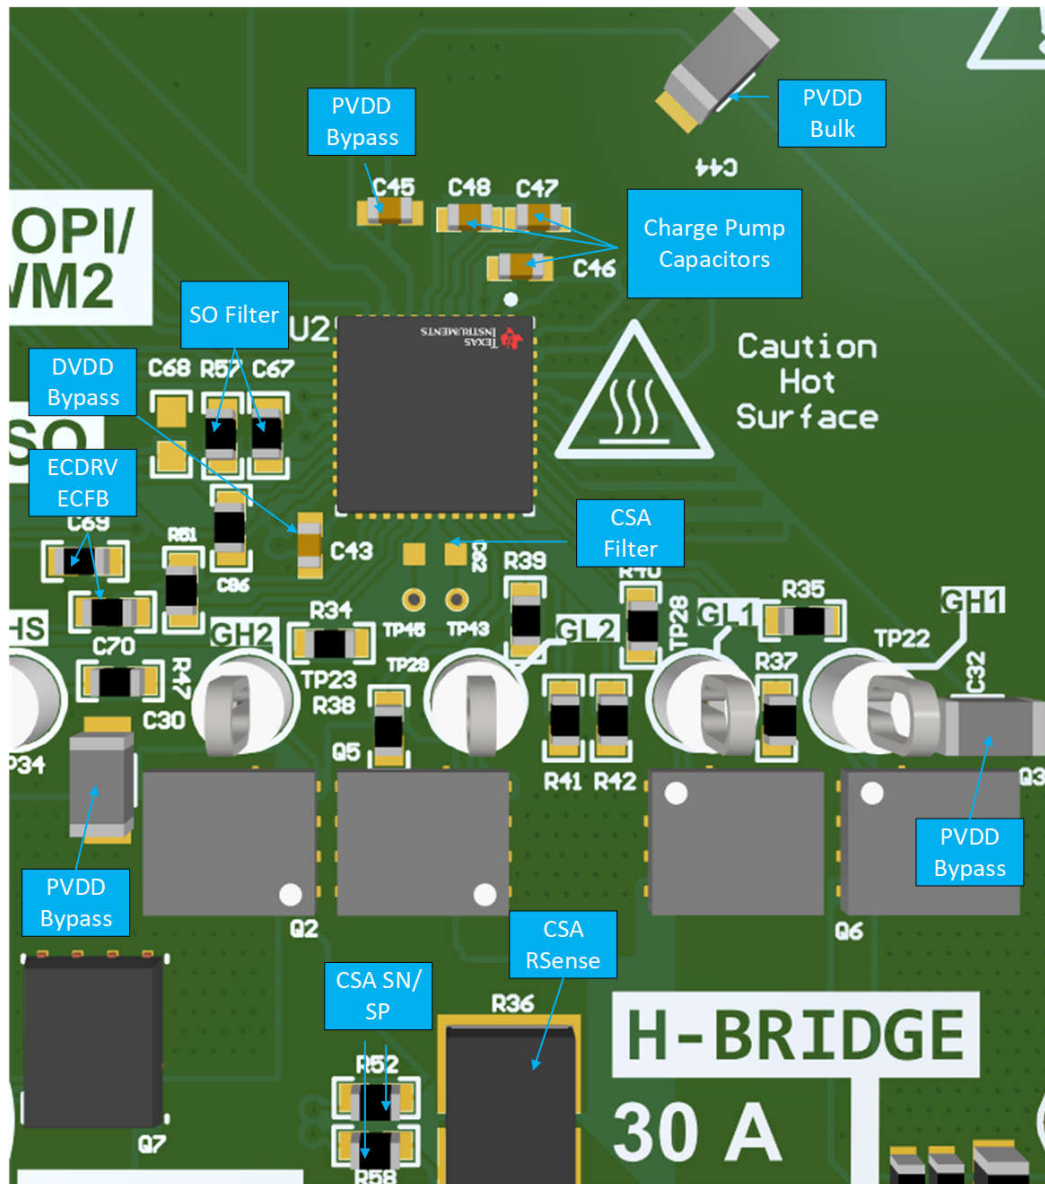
DRV8000-Q1 Component Placement and Layout
